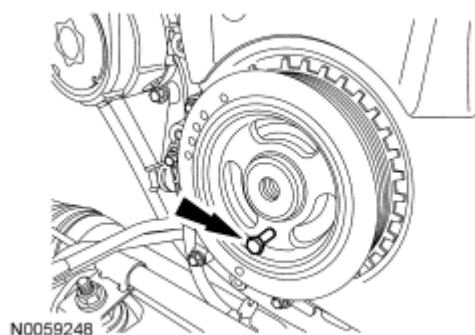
Locating Crankshaft Pulley & Hole
